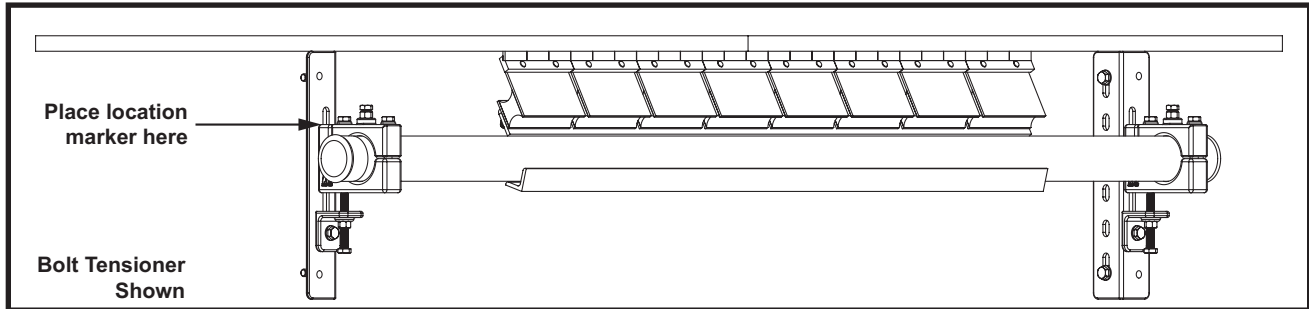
Martin® P2 Secondary Belt Cleaner HD Location Marker Location
